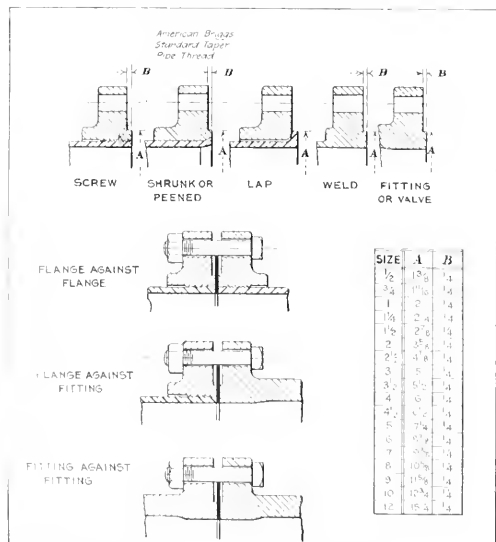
FLANGE JOINTS AND METHODS OF ATTACHING FLANGES TO PIPE, 800-LB. AND 1200-LB. HYDRAULIC AMERICAN STANDARD
